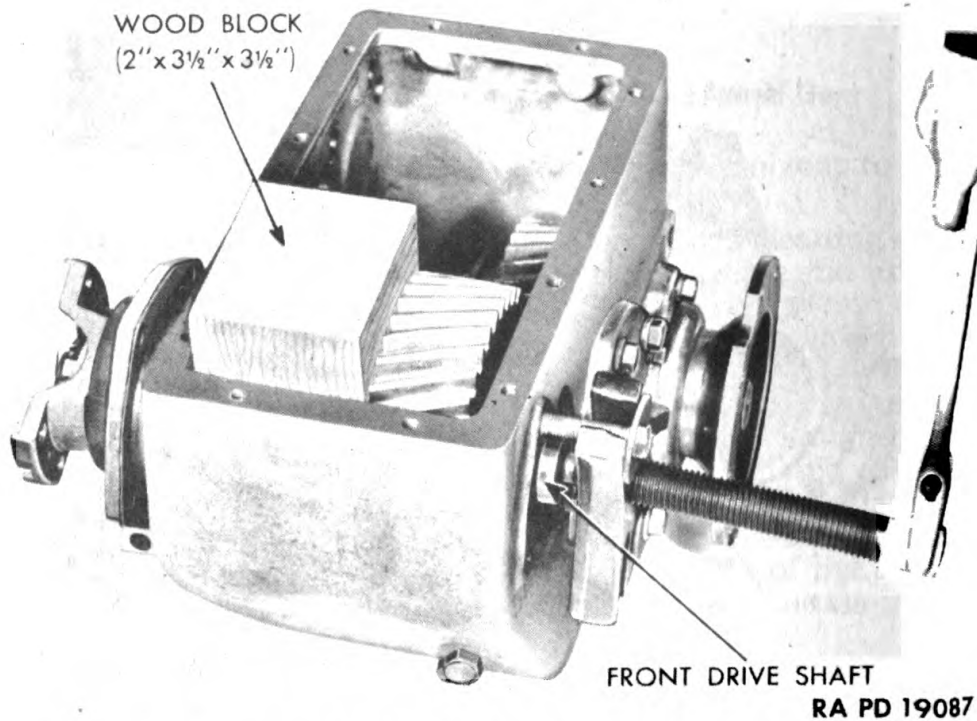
Pressing Front Axle Drive Shaft from Transfer Case
